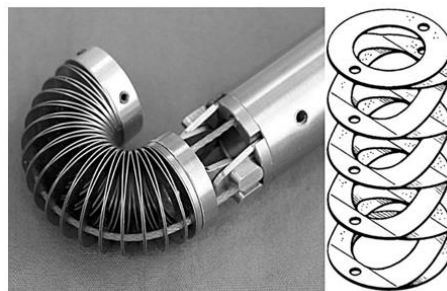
Steerable tip and ring-spring version I with diameter of 15 mm [21]
